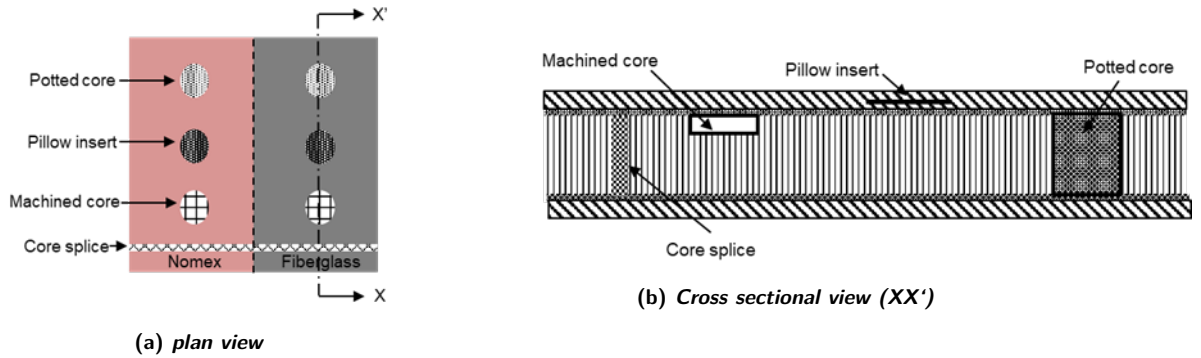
Schematic of the top view and cross sectional view of honeycomb panel with engineered defects
